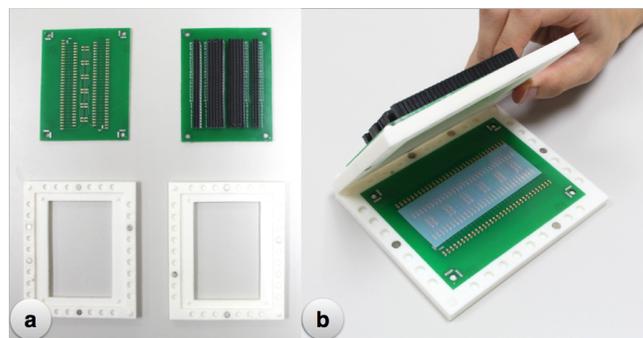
Magnetically-assembled CircuitStack. (a) Each 3D printed case fits one PCB layer. Magnets are on the edges of 3D printed case. (b) The conceptual assembled state of our magnetic-snapping approach.
